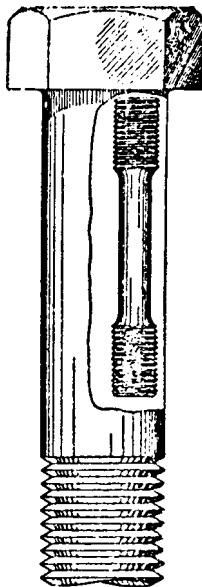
Location of Standard Round 2-in. Gauge Length Tension Test Specimen When Turned from Large Size Bolt
